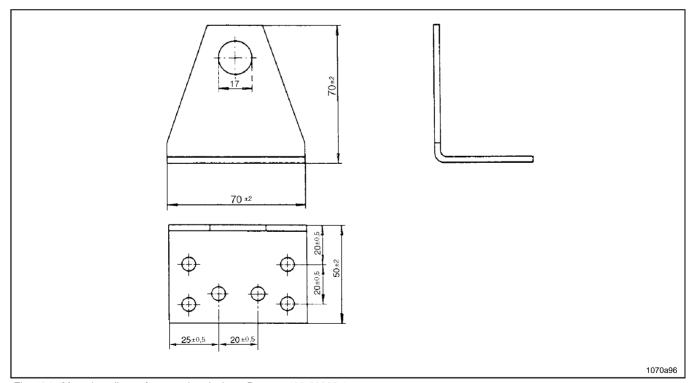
Mounting elbows for metering devices, Part no. 432-23982-1
